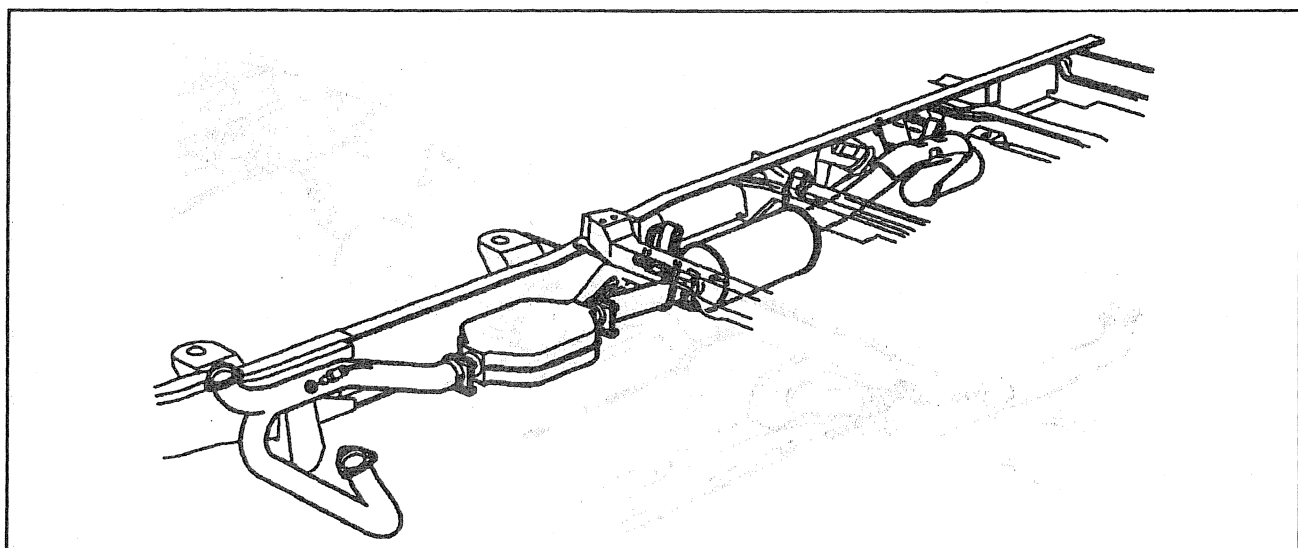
Exhaust System - C 3 Cab Chassis (Model 310 w/L05 & 15,000 GVW)
